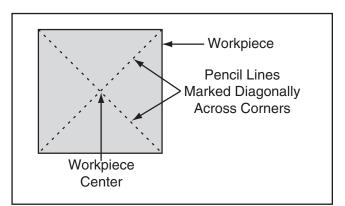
Workpiece marked diagonally from corner to corner to determine the center.
